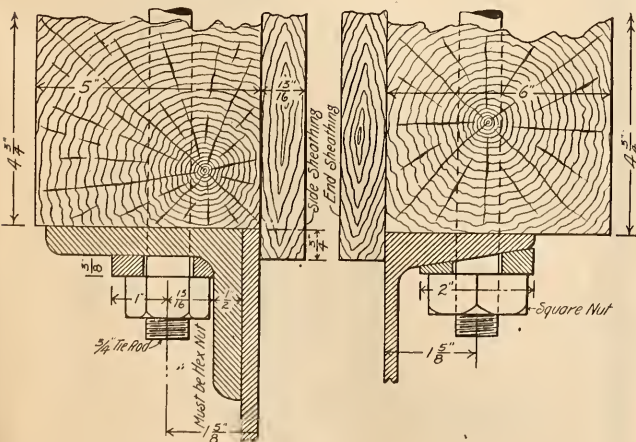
METHOD OF FASTENING TIMBERS TO UNDERFRAMING—80,000 LBS. CAPACITY STEEL UNDERFRAME BOX CARS—ILLINOIS CENTRAL RAILROAD.
